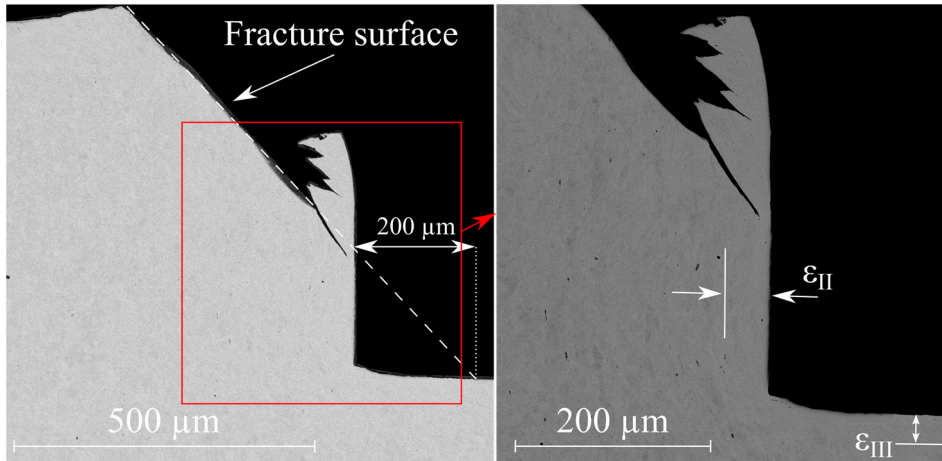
Chip roots from quick-stop machining before extraction from the workpiece.
